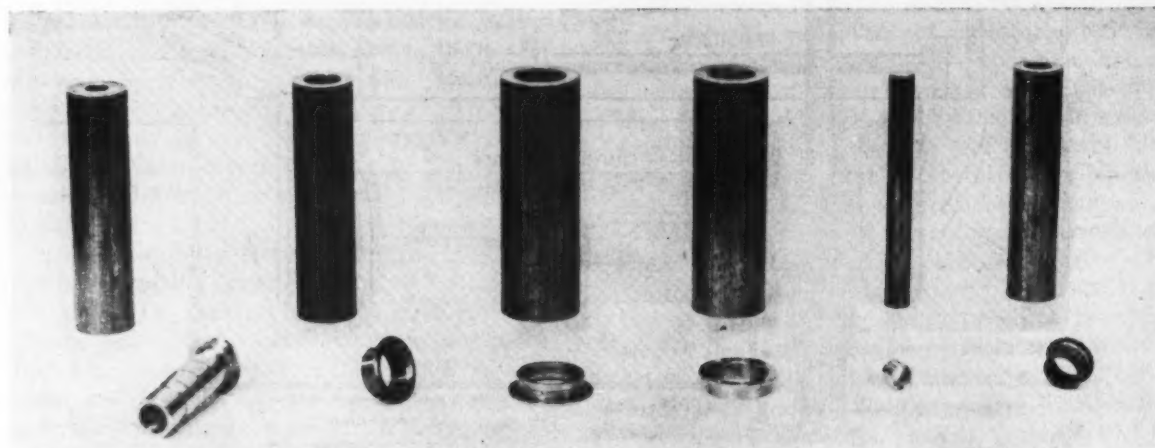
Valve guide (left) and typical bushings for aircraft engines produced from continuously cast stock. Photo courtesy Wright Aeronautical Corp. and Aircraft Precision Products Co.
